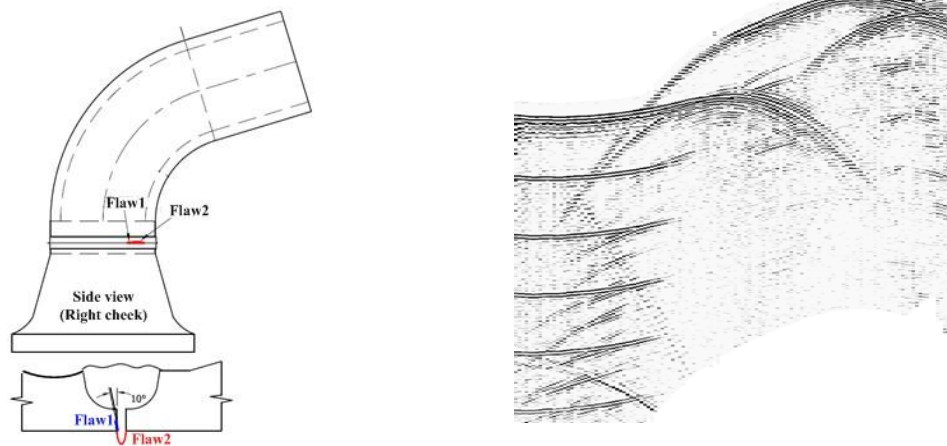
Crack & excess pen., at weld root. Figure 26: FMC main diagonal for crack & excess pen at weld root.
